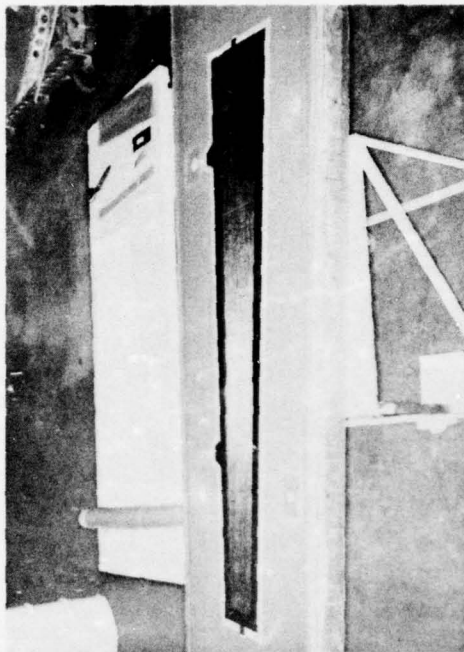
LOWER SKIN AND PICTURE FRAME DOUBLERS AFTER TRANSFER TO MOLDING TOOL
